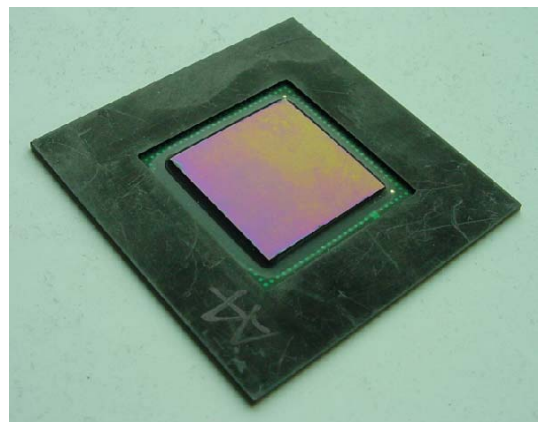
Outline of the larger die, copper pillar bump flip chip package with heat sink ring at the periphery.
